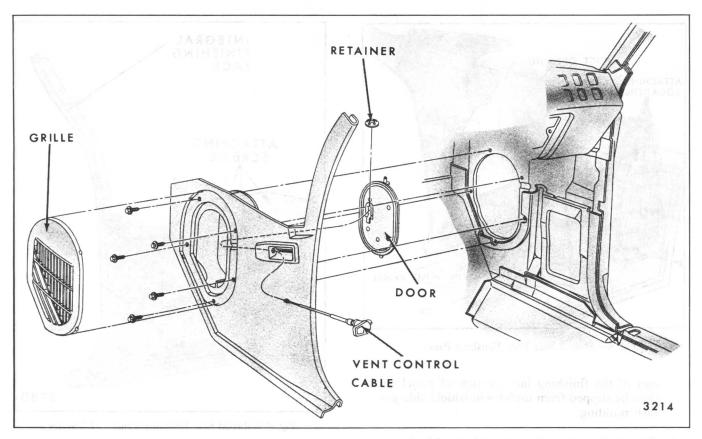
Shroud Side Finishing Panel - "X" Styles
